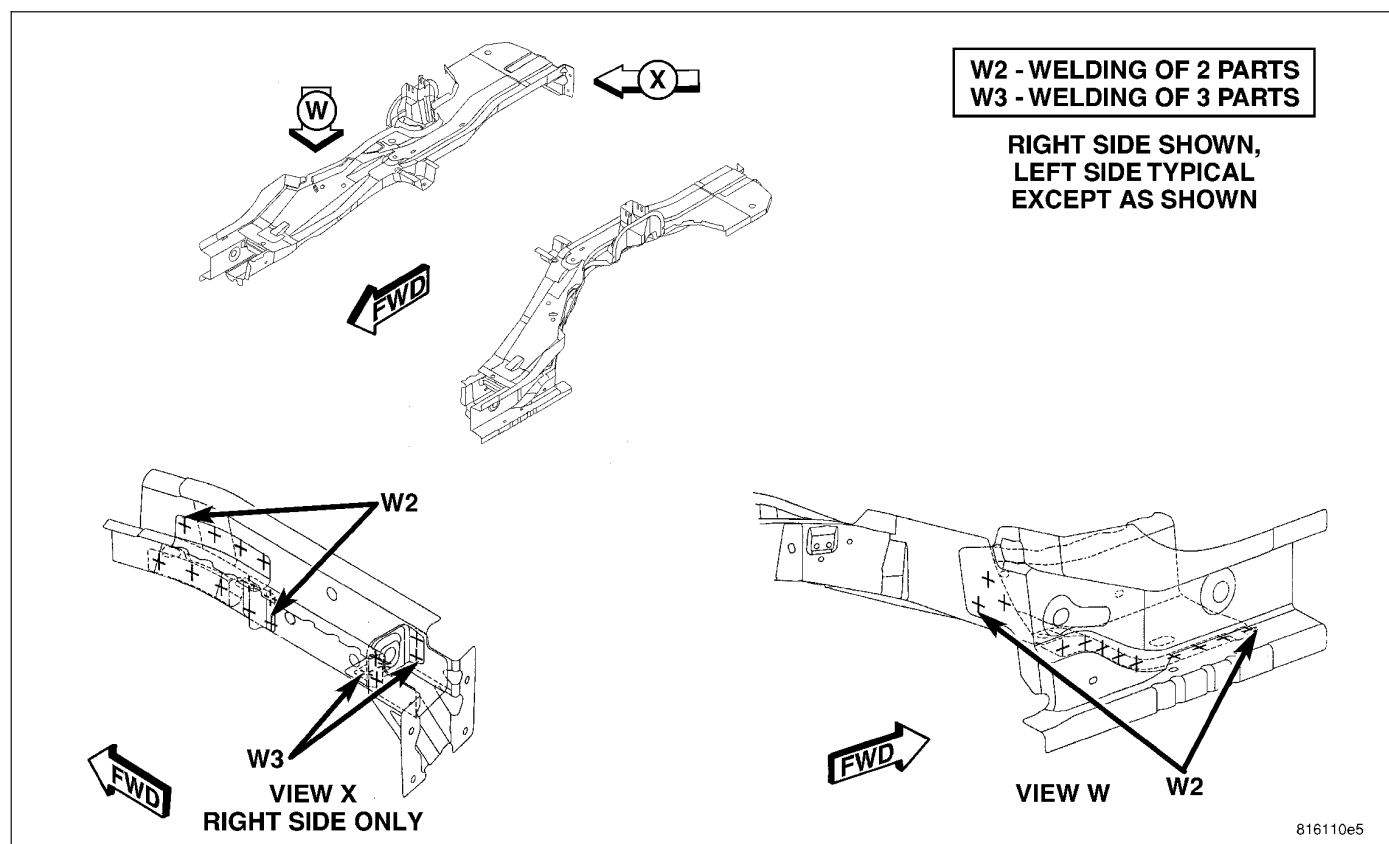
SIDEMEMBER ASSEMBLY (2 OF 17)
